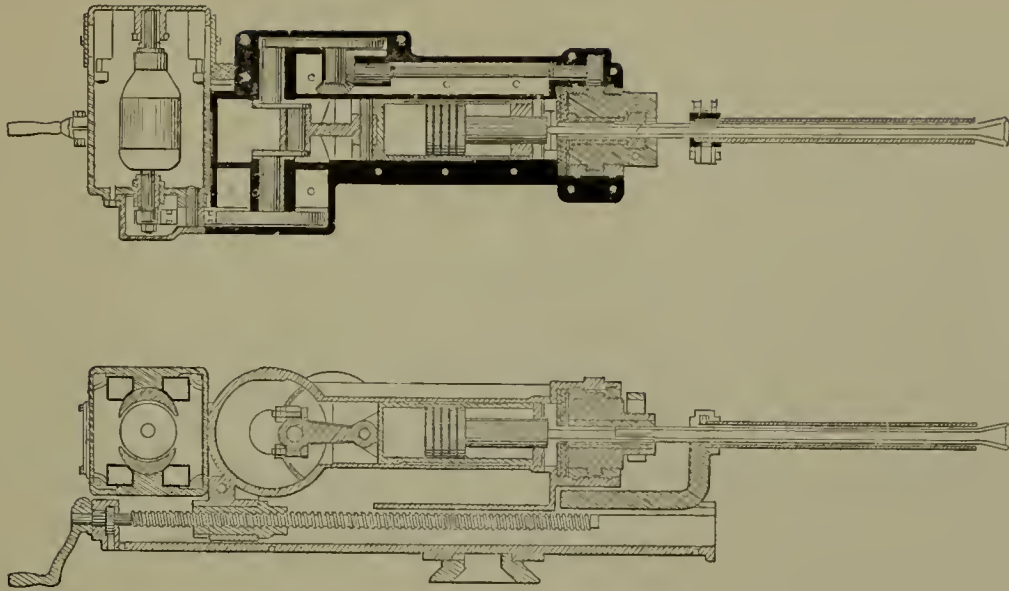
CROSS-SECTIONAL VIEWS SHOWING THE CONSTRUCTION OF THE BOX ELECTRIC DRILL MADE BY THE H. D. CRIPPEN MANUFACTURING COMPANY, NEW YORK
